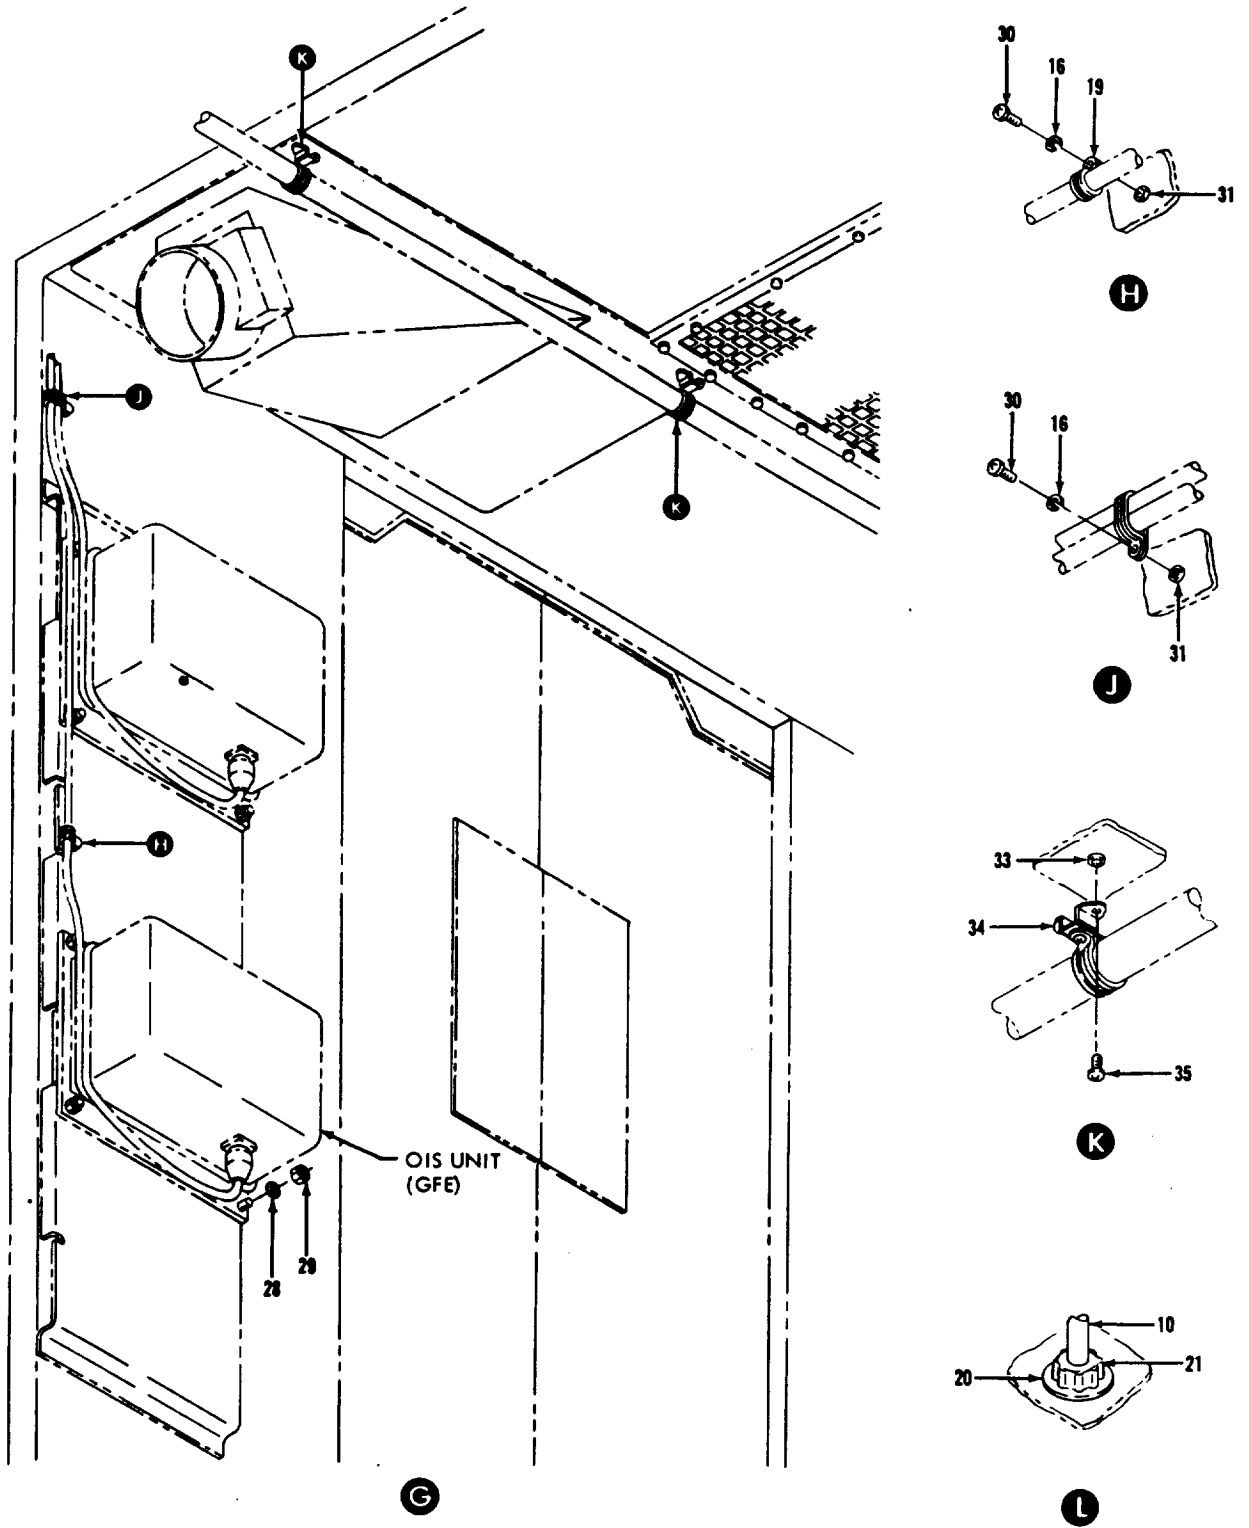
Electrical Equipment Installation (Sheet 4 of 19)
